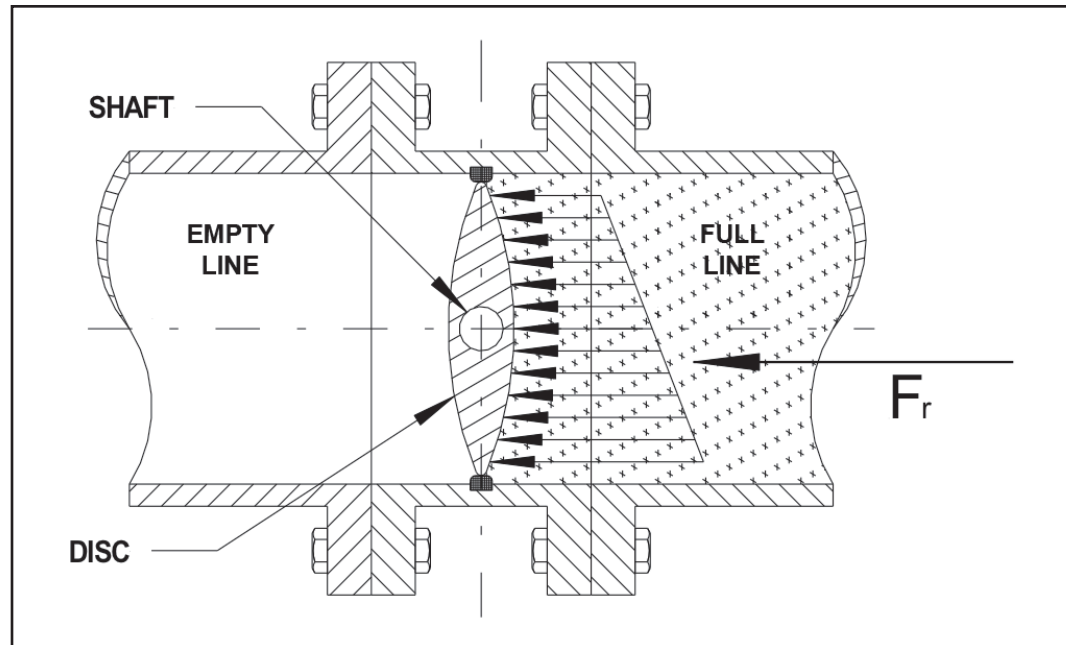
Horizontal valve shaft in a horizontal pipe
